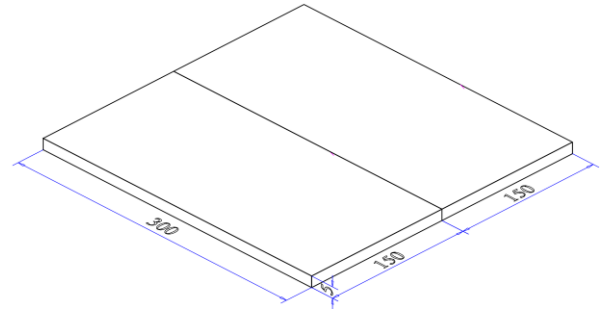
Dimension of the aluminum alloy AA7075-T6
